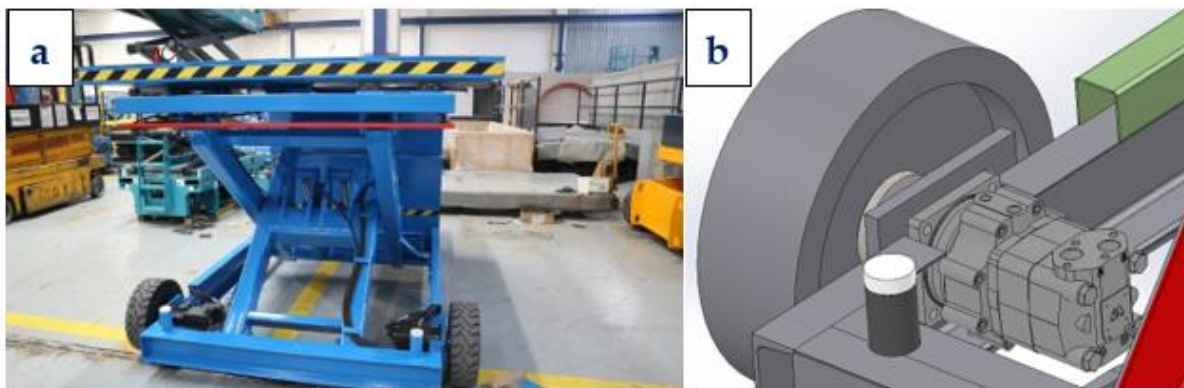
a. Location of the Hydro Motor System on the Prototype, b Hydro Motor-Wheel Connection Model
